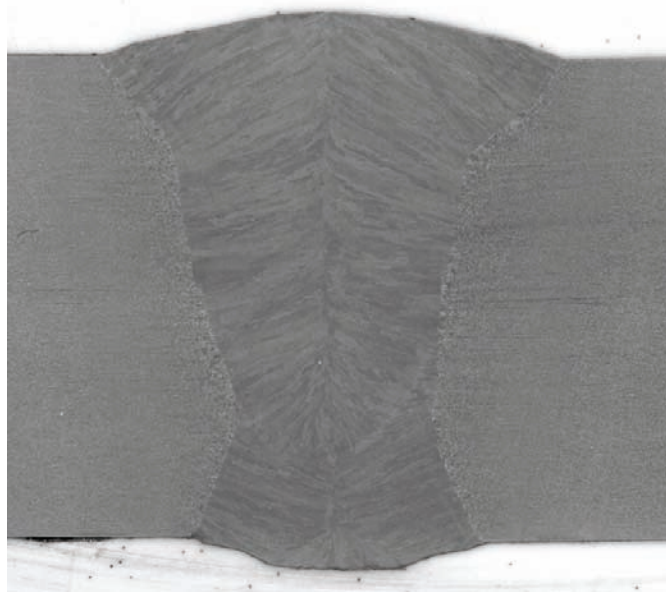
1” DH36 One-sided Weld, ESAB OK10.62 – Cap Side
